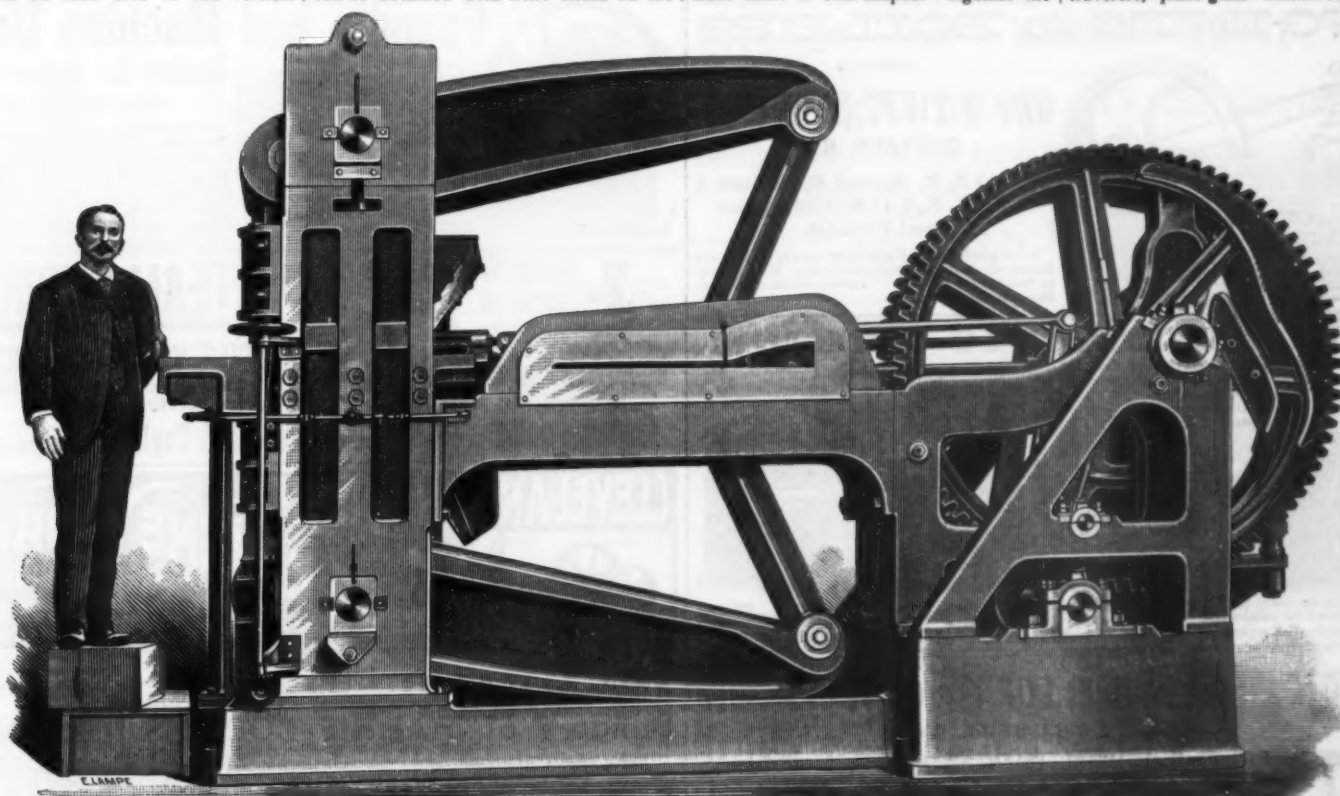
SIDE VIEW OF THE LION DRY CLAY BRICK MACHINE.
